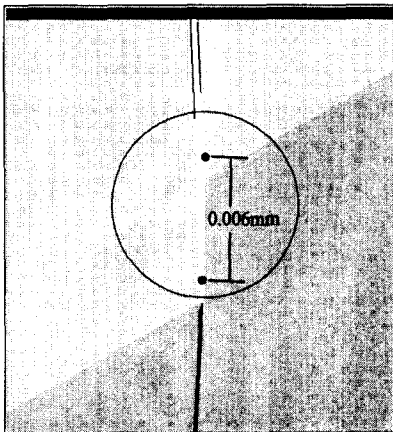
Sharp triangle can be removed by applying tolerance.
